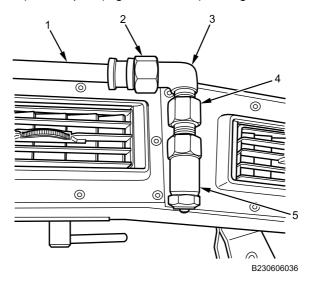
Front FSS Cabin/Crew Dispersion Unit and Pipe.
